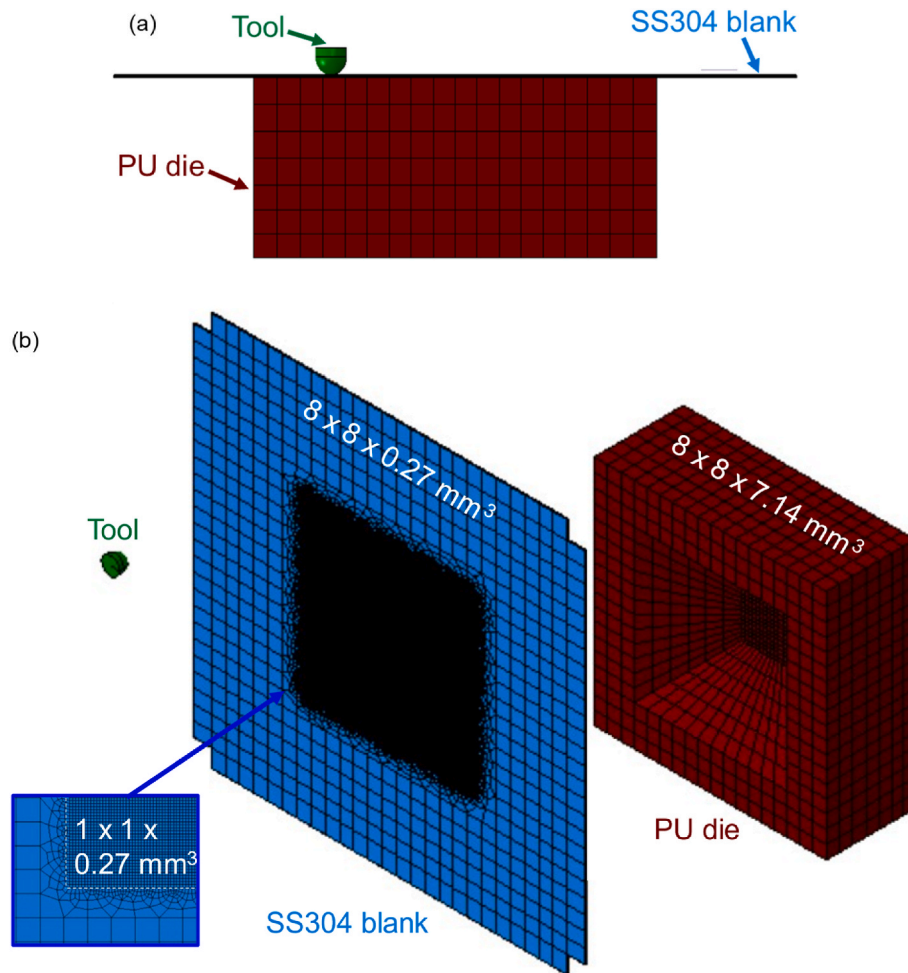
FE model assembly for CSSIF and TCSSIF: (a) side and (b) exploded isometric views.
